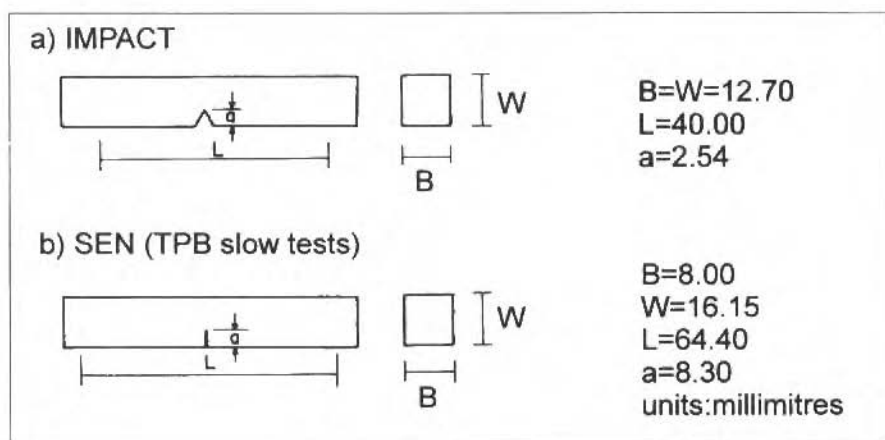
Geometry and dimensions, in millimeters, of the test specimens
